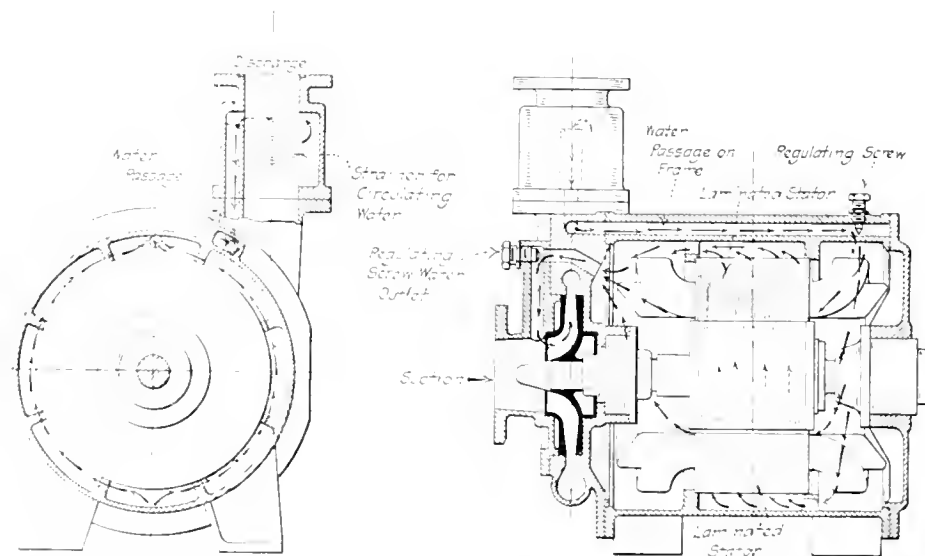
SECTIONS THROUGH SUBMERSIBLE PUMP AND MOTOR USED BY THE SALVAGE SECTION OF THE BRITISH ADMIRALTY
